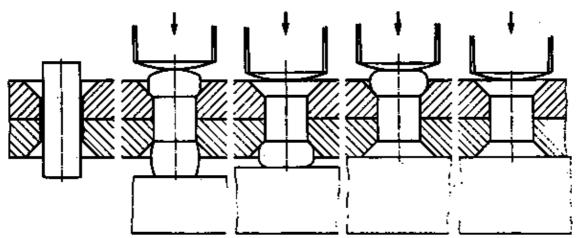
Sequence of operations for a double-strap countersunk-head riveting with rivet bolt
